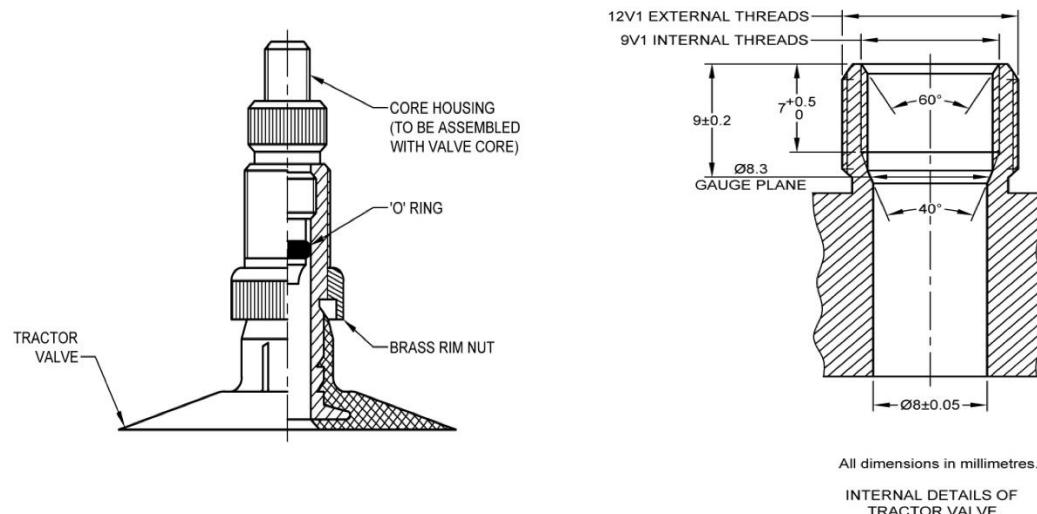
TRACTOR VALVE AIR WATER FILLING TYPE (SEE FIG. 18 FOR ASSEMBLY)
